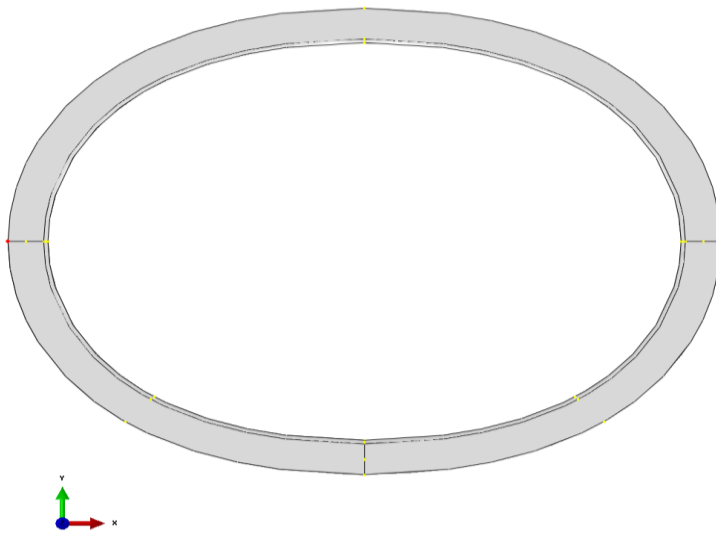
Reference components for cup-shaped adhesive layer specimen
